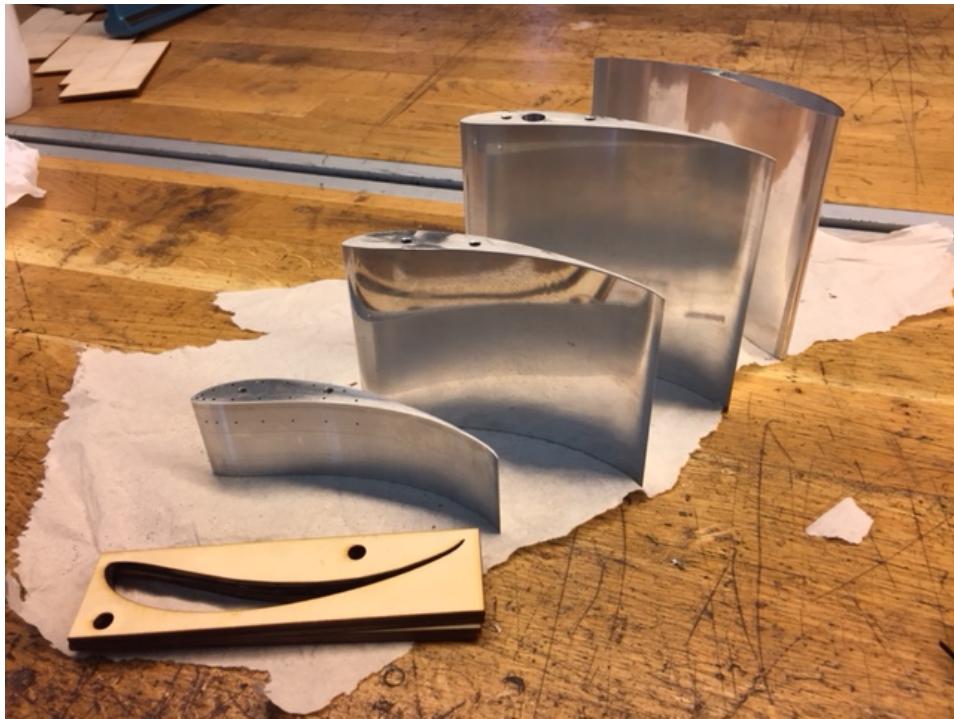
Pieces of the downscaled wing before assembly. Additional H7 holes had to be drilled in order to mount the wing to the force gauge securely.
